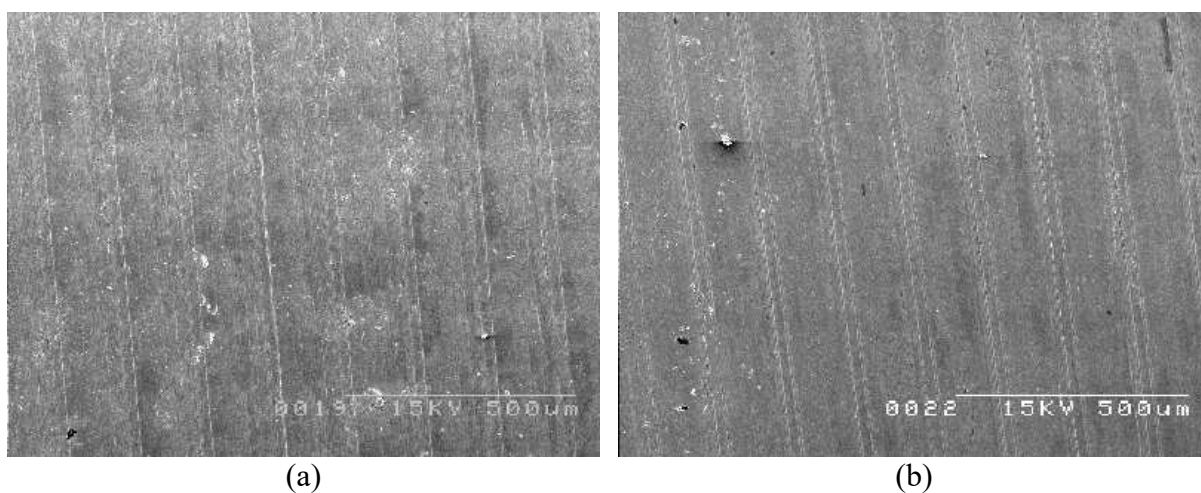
Surfaces generated after machining with uncoated carbide T2 tool with coolant pressures of (a) 11 MPa and (b) 20.3 MPa at a cutting speed of 110 m min^{-1} .
